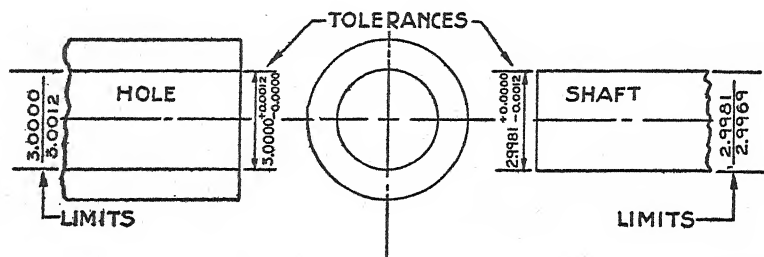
Hole and Shaft Dimensions Showing Tolerances, Limits, and Allowances for the A.S.A. Medium Fit, Class 3.
